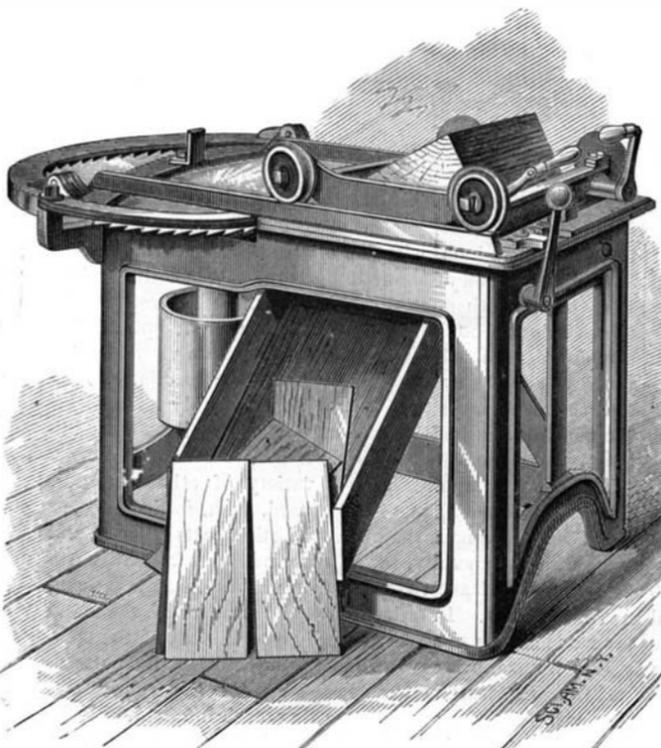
THE VICTOR SHINGLE-SAWING MACHINE.
